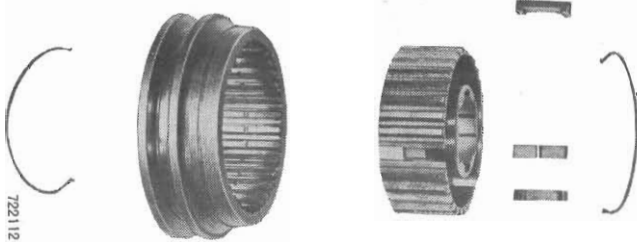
Exploded view—third and fourth speed synchronizer.
